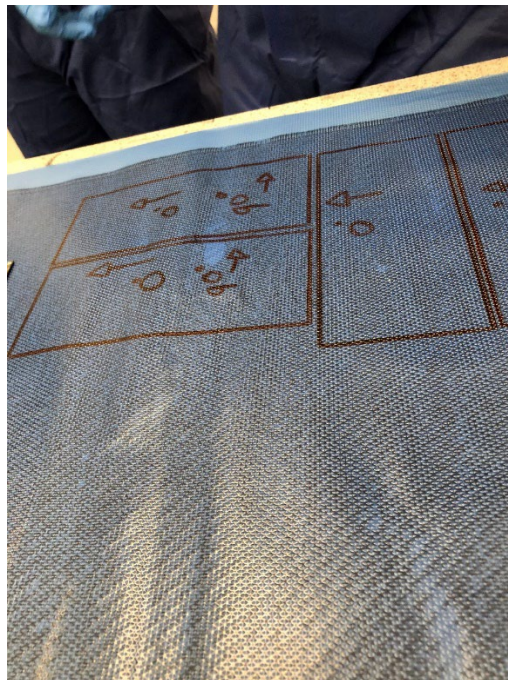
showing material being marked out ready for cutting. Orientation of plies is identified and marked on the backing film.
